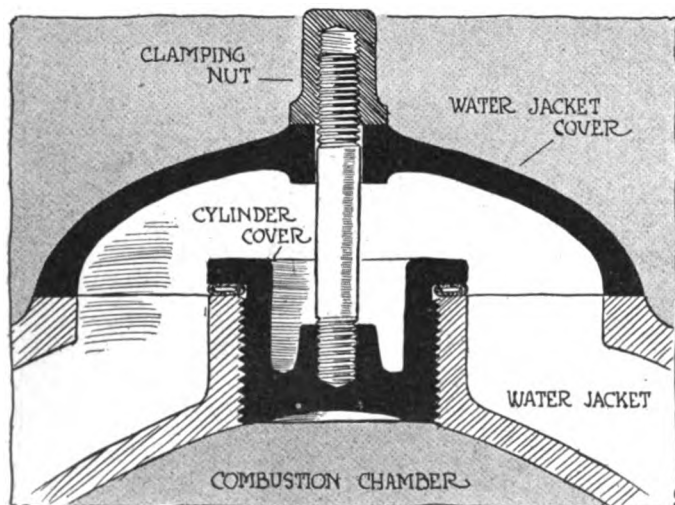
Securing cylinder-head plug in Cottin & Desgouttes motor in 16-horsepower chassis
